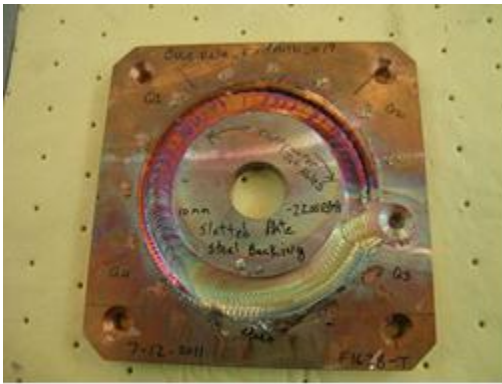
Surface breaching void defect due to weld parameters that did not deliver enough weld energy for a consolidated joint.
